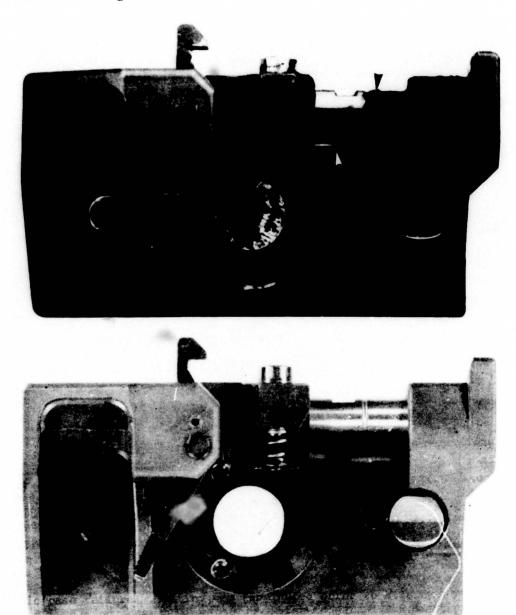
Residual Fouling Deposits on Rear of Feeder Assembly (Arrows) of the 5.56-MM HK-23A1 Machine Gun (TOP), after 1295 Rounds of Firing. Clean Feeder Assembly Is Shown at Bottom for Comparison.
